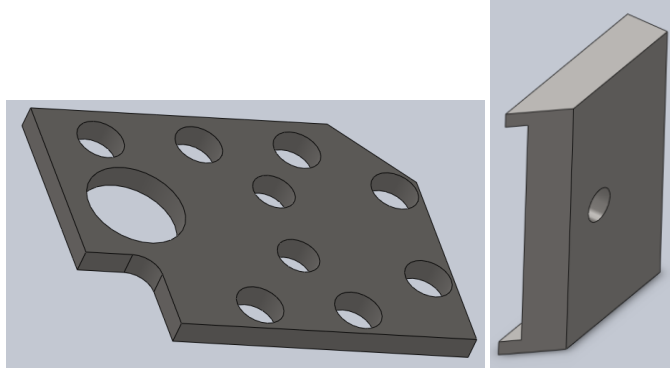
Stainless Steel Cover Plate (left) and Backing Plate (right)
